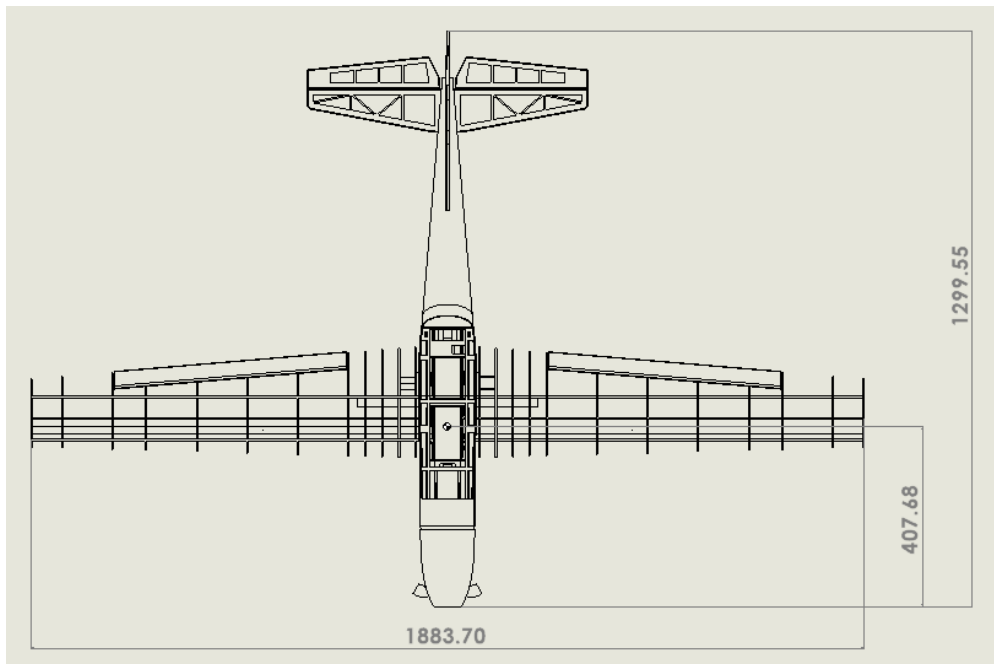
Top View Drawing with Major Dimensions [mm]
